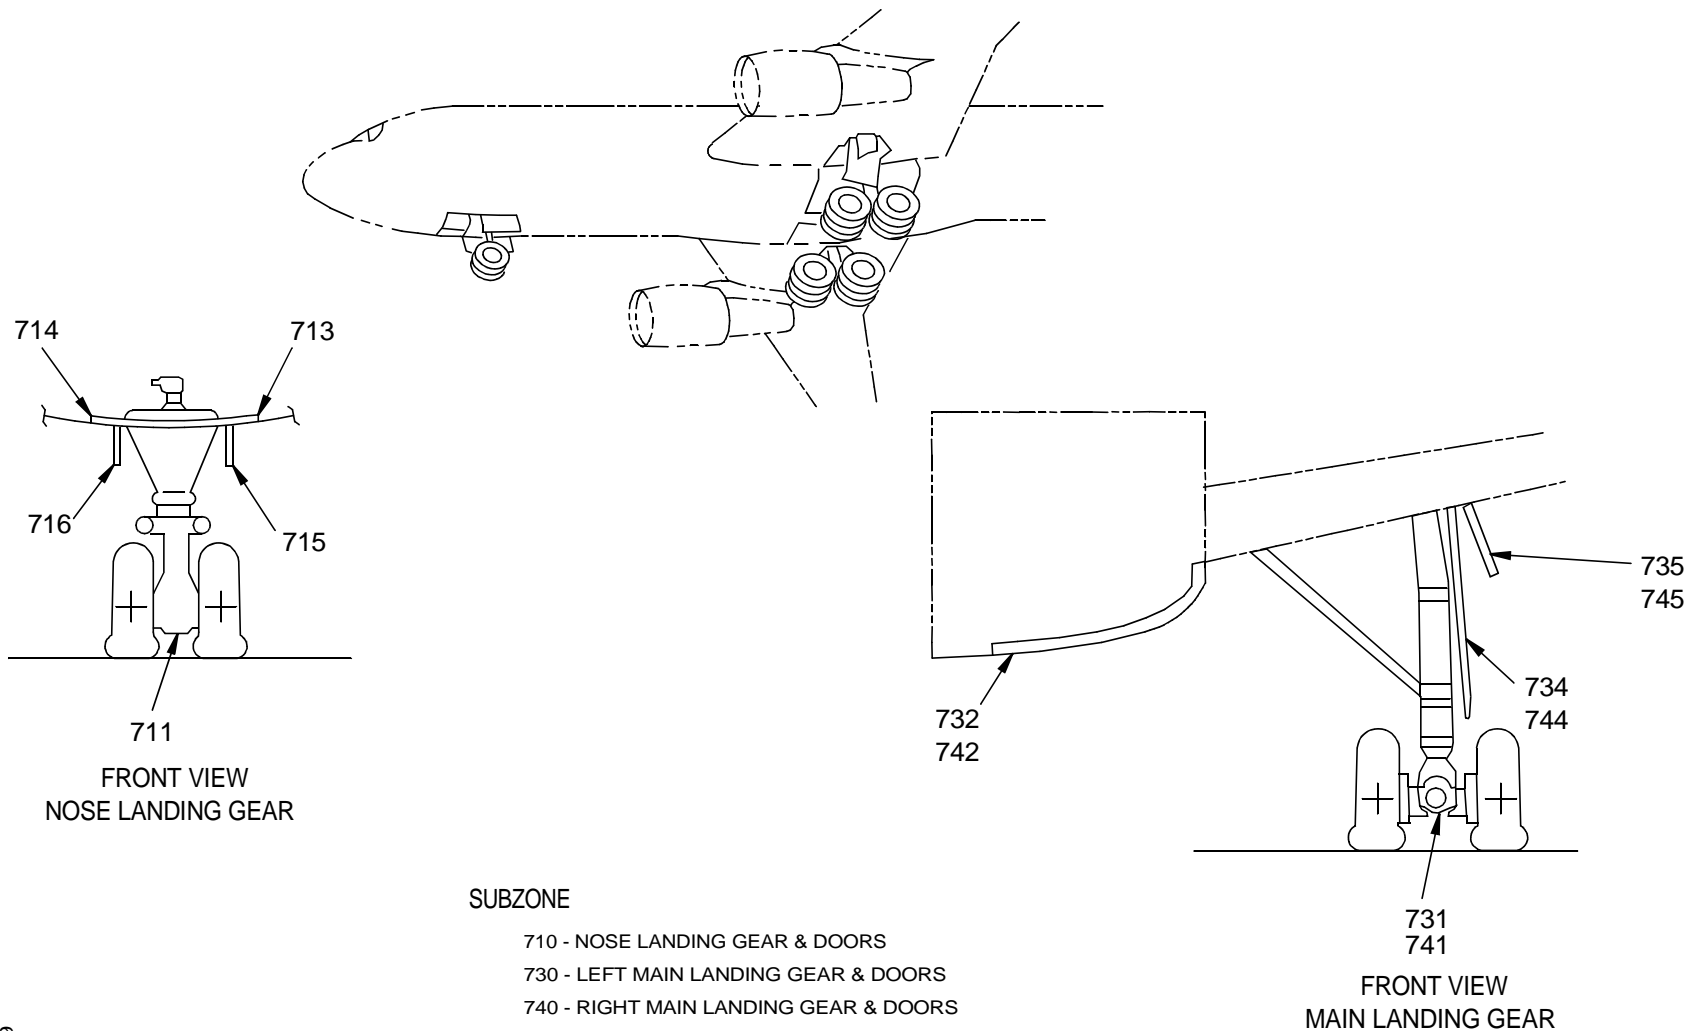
MAJOR ZONE 700 - LANDING GEAR & LANDING GEAR DOORS
